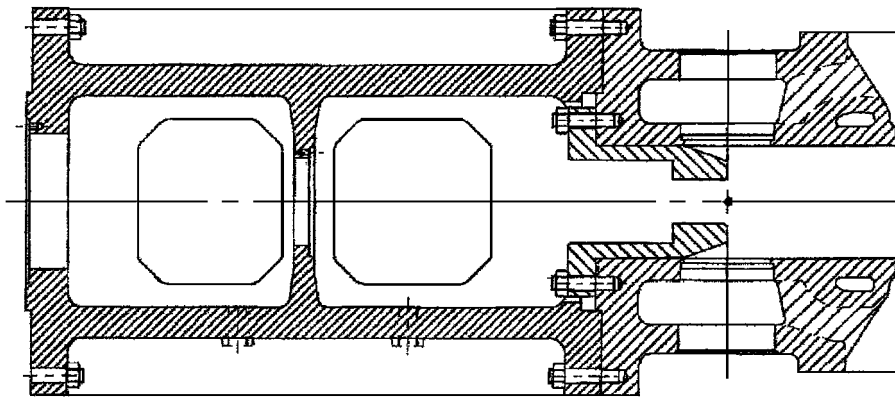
Distance piece with a small cylinder. (Dresser-Rand Company, Painted Post, N.Y.)
